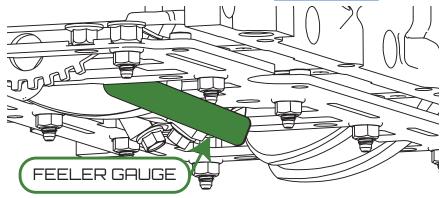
Inspecting Clearance with a Feeler Gauge
